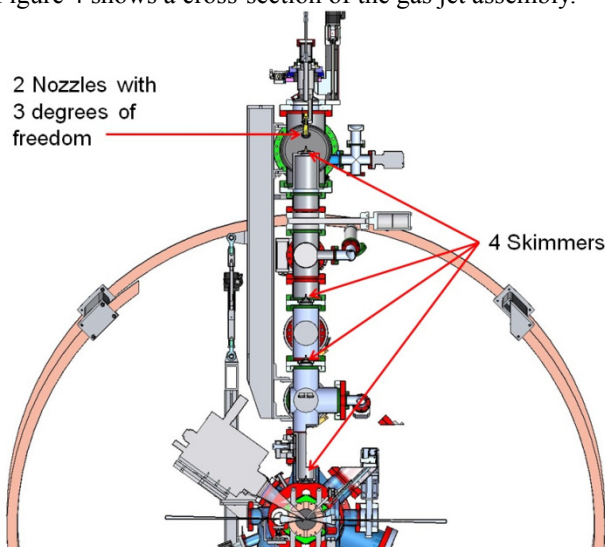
Cross section view of the multi-stage skimmed gas jet assembly.
